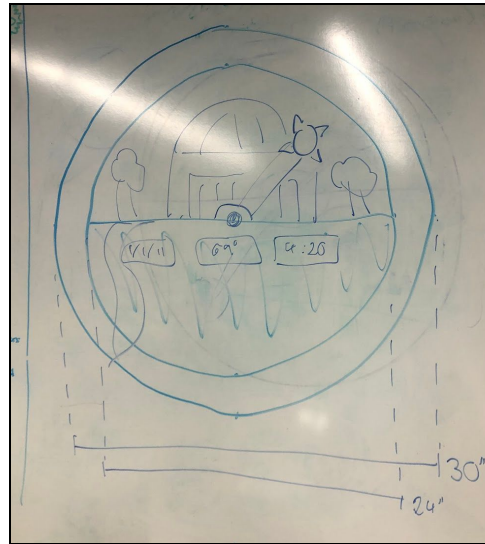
Whiteboard drawing of dimensioned window front face and viewing area
